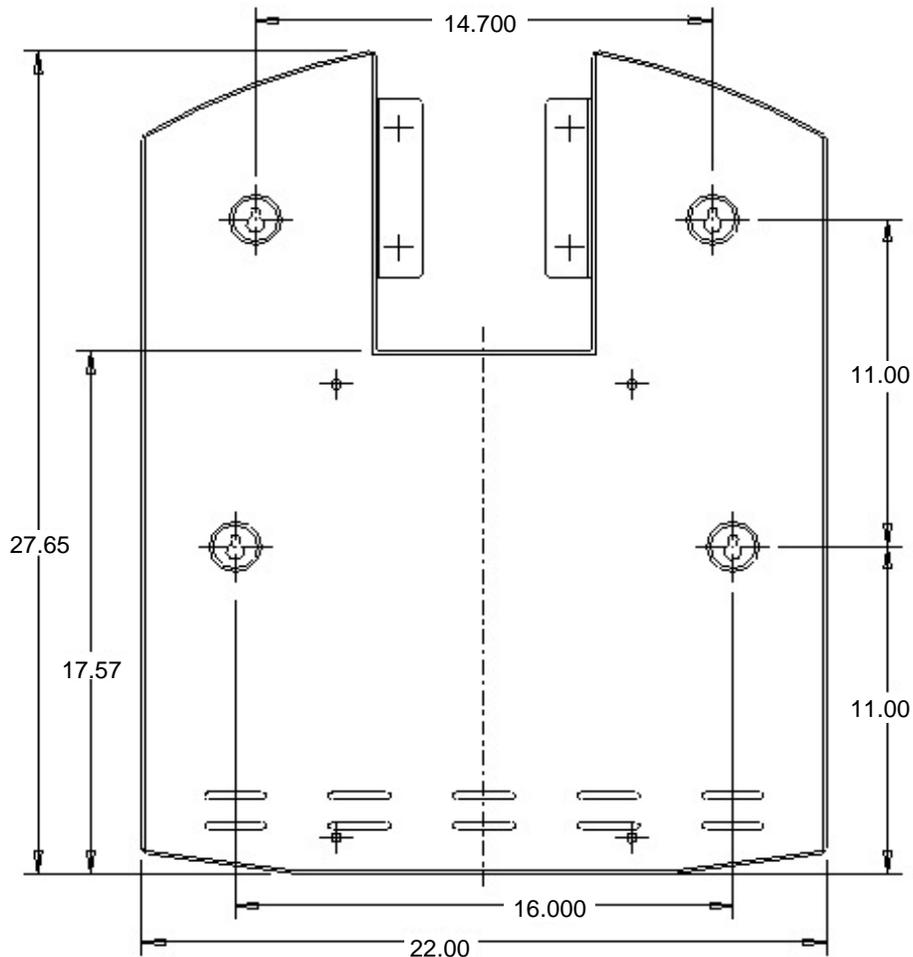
Dimensions to mount the Wet Section. (All dimensions in inches)
